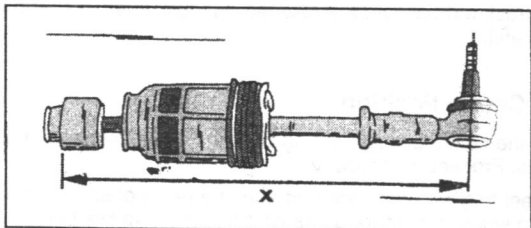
Before fitting the steering set the track rods to a length of 322.0 mm (dimension "X").
